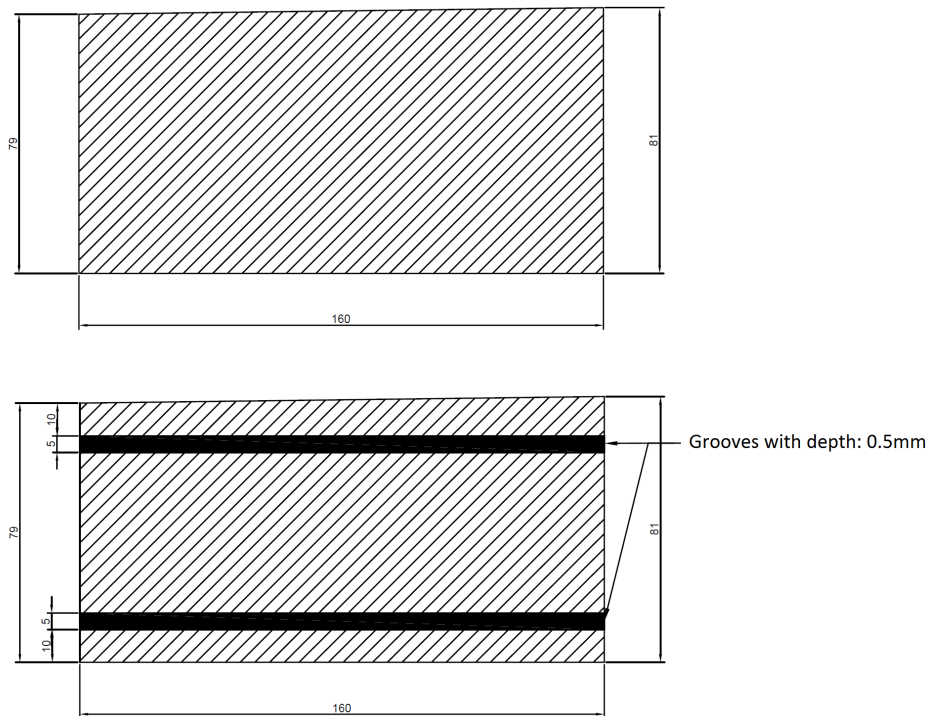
Dimensions of the copper pieces for cooling the joints. The unit is millimeter.
